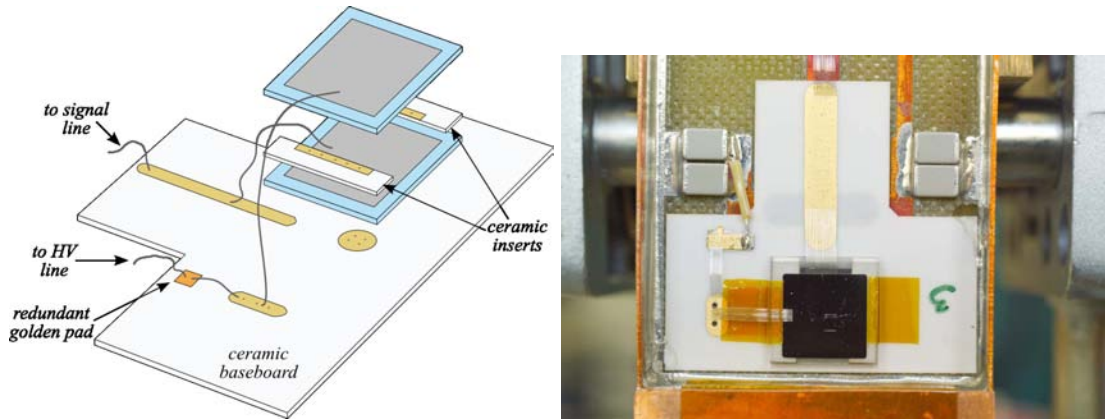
Left: A diamond double decker assembly with ceramic inserts and baseboard used in the final modules. Right: Picture of the ceramic assembly in the module.
